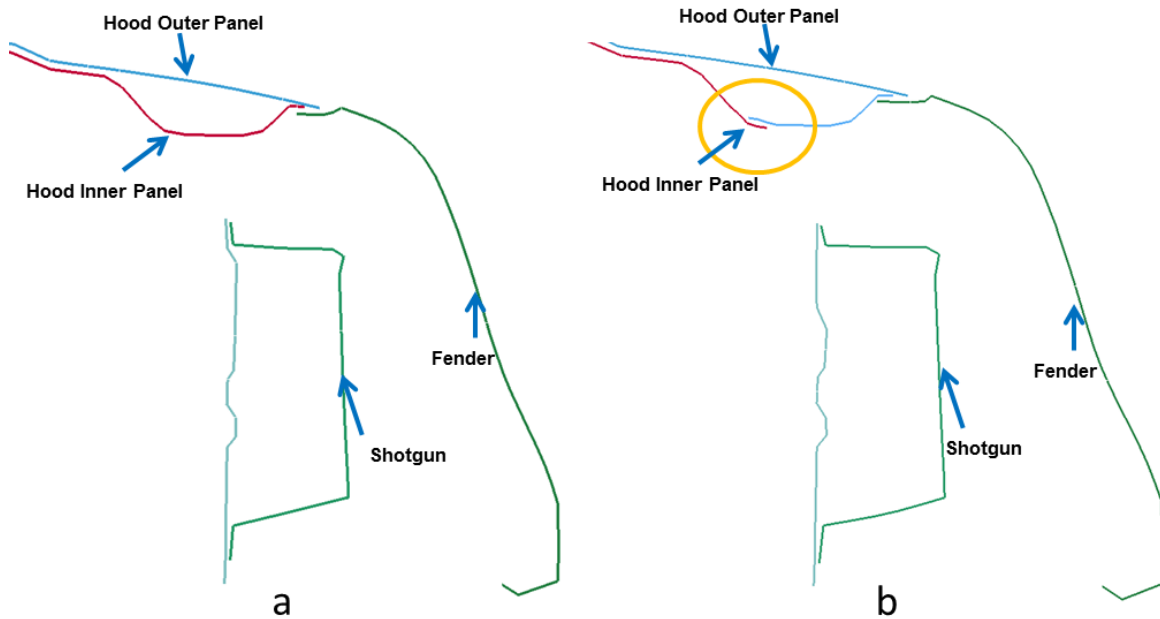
cross-sectional views with section cut for the fender, hood panels and shotgun: a) hood inner panel cross section, and b) hood inner cross section with shear panel (highlighted in the circle).
